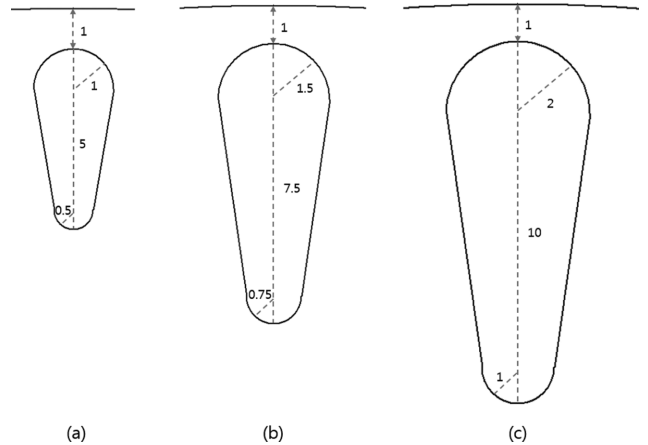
Three Squirrel cage rotors that have different dimensions.
